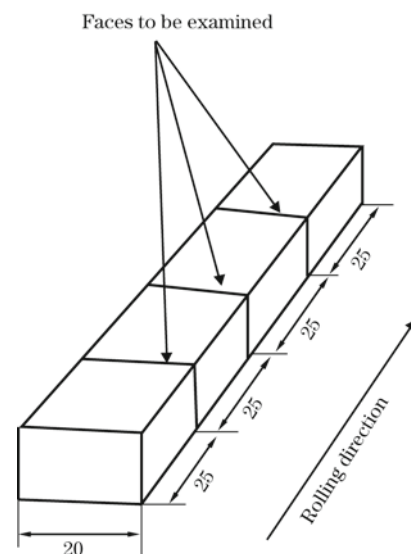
Schematic of specimen for HIC test and the faces examined (unit: mm)
